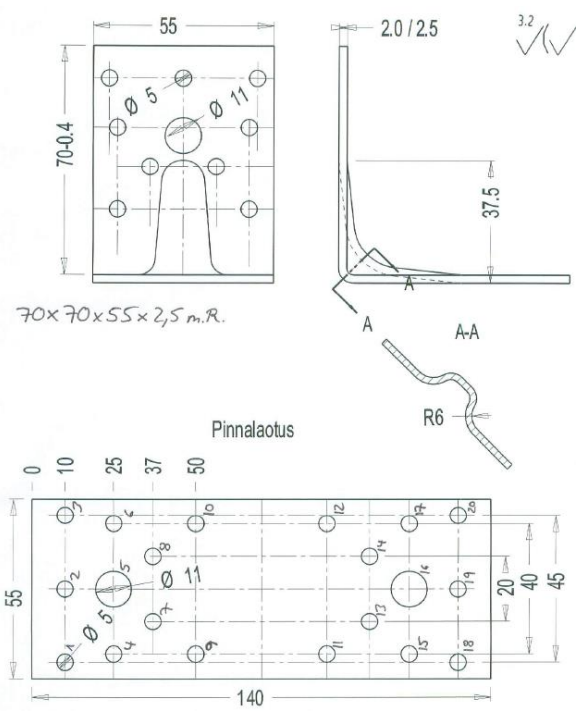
Dimensions of angle bracket 70x70x55x2,5 (with rib)
